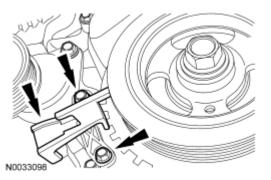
Locating CKP Sensor Alignment Tool And Bolts Courtesy of FORD MOTOR CO.
